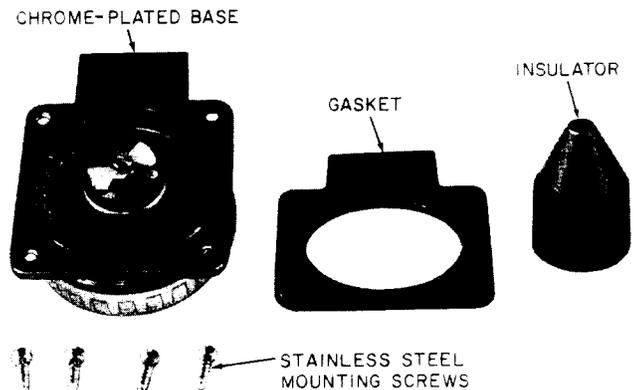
B Waterproof Male Jack (Rear View, Gasket, and Insulator Removed)
